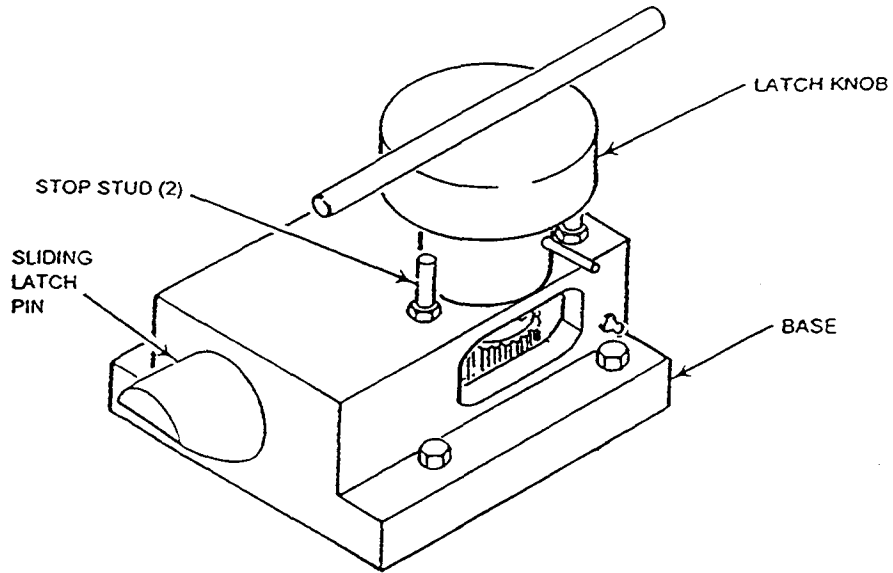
Retractable Sliding Padeye Latch Assembly
